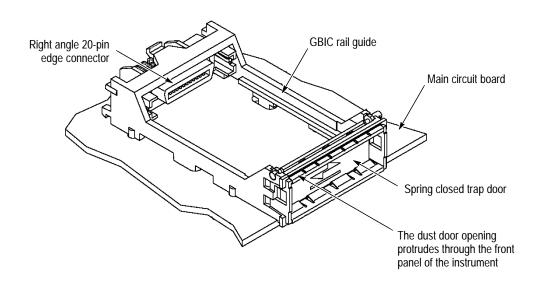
Isometric view of AMP GBIC receptacle rail guide assembly.
